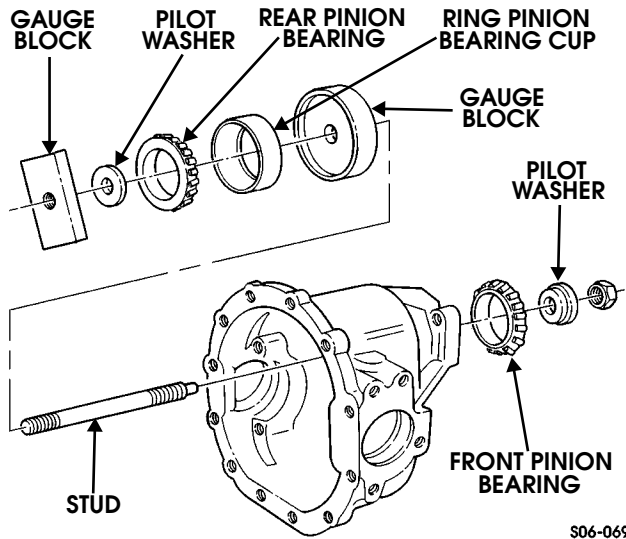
Pinion Front Bearing and Depth Tool Removal
